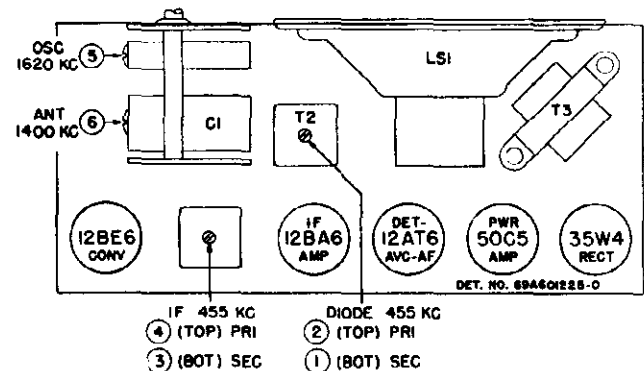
TUBE AND TRIMMER LOCATIONS
